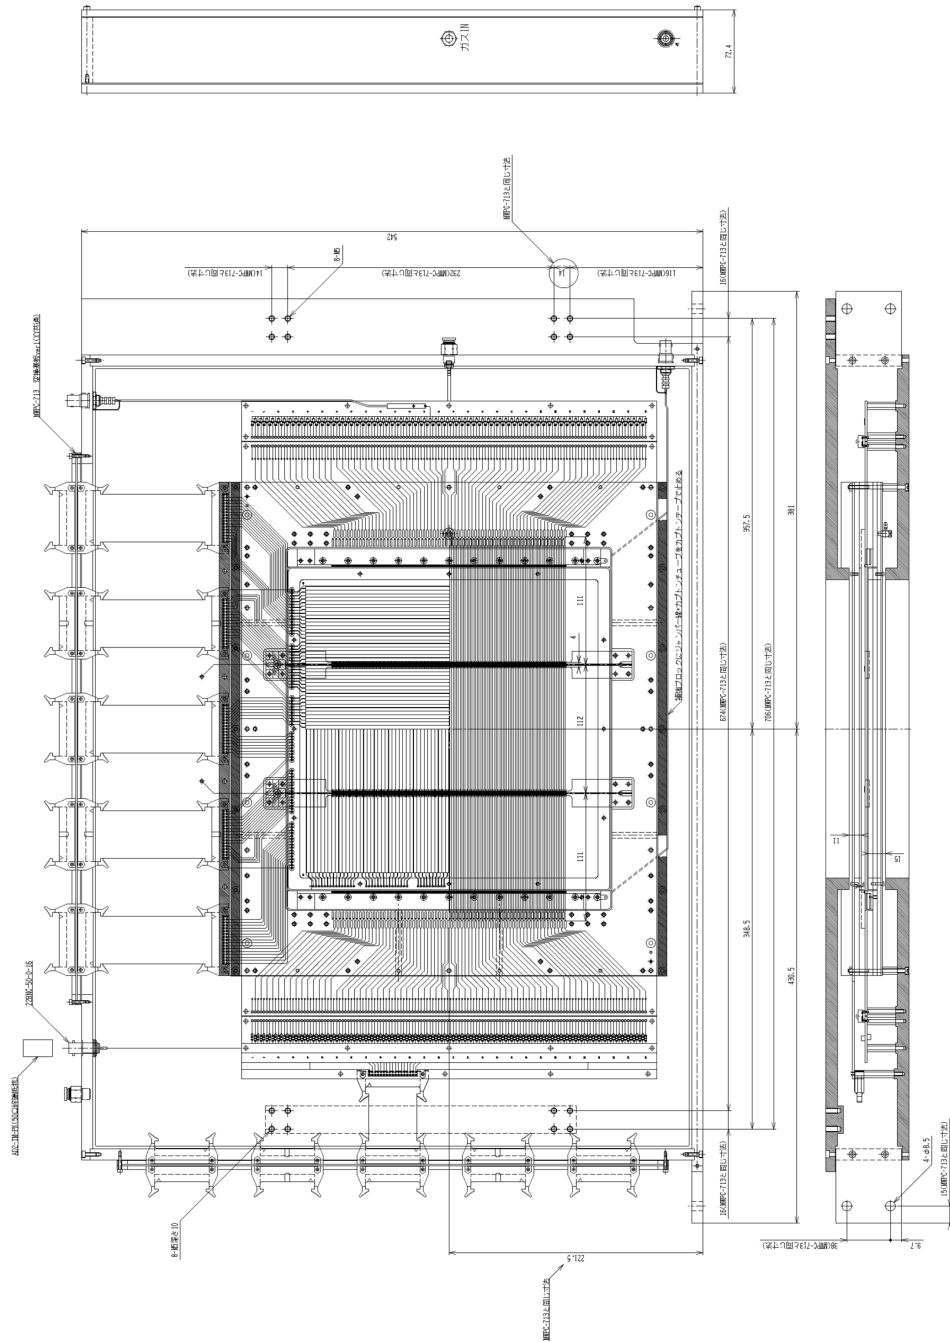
Drawing of the 724-type MWPC used for wire chamber 0 and 1.
